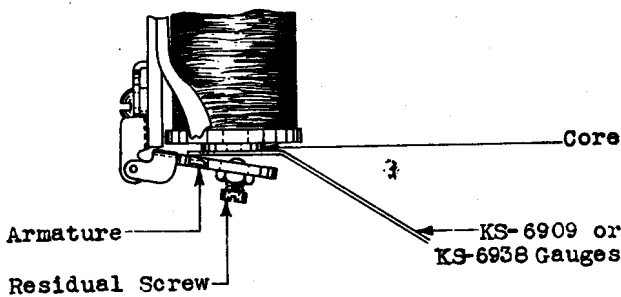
Incorrect Method of Checking Armature Travel and Spring Gauging
